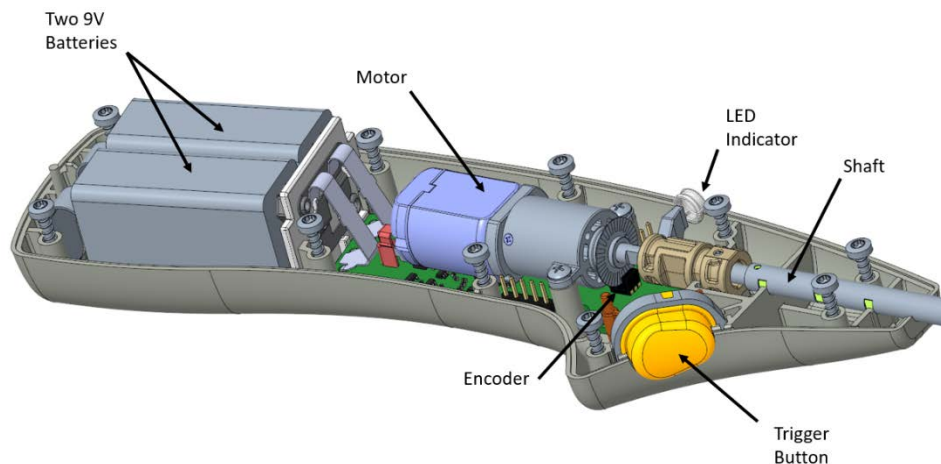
MaxTack™ Motorized Fixation Device Handle Internal Assembly – 1
